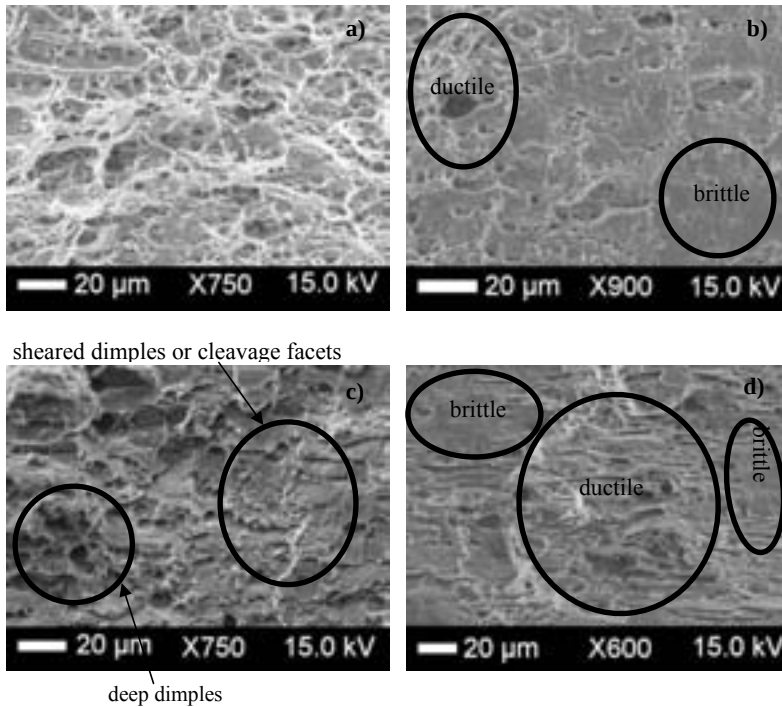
The fracture surfaces of some sample welds from configurations 2 (a-b), 1 (c), and 4 (d).
